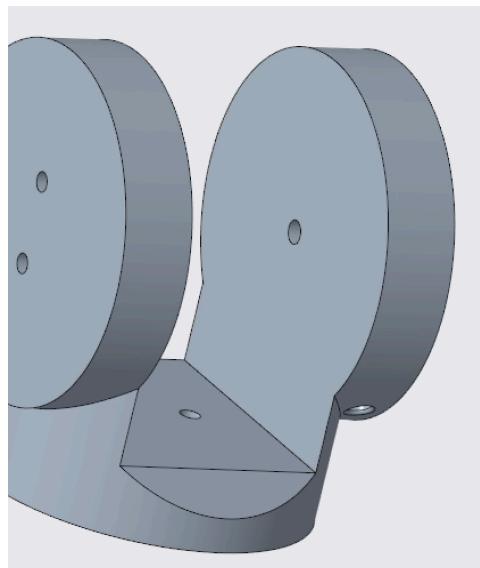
Wire channel holes for high flex wire in rotational yaw piece.
